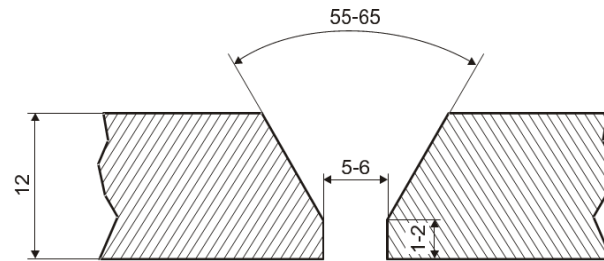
Shape and dimensions of “Y” groove for GMAW.
